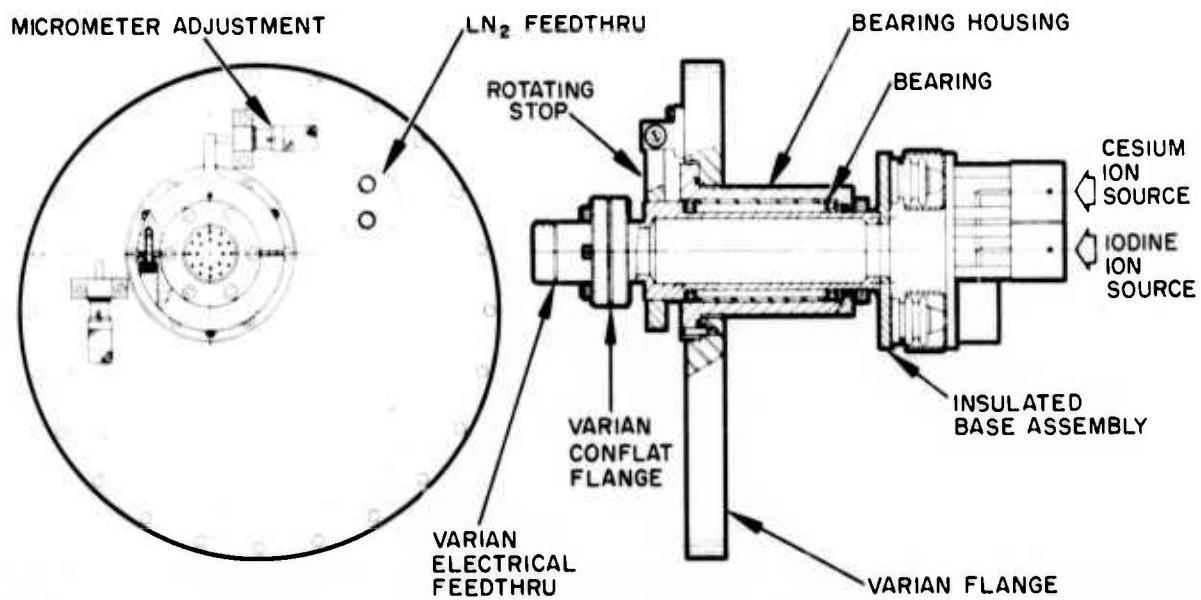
Detail of rotating assembly used to reposition cesium or iodine sources.
